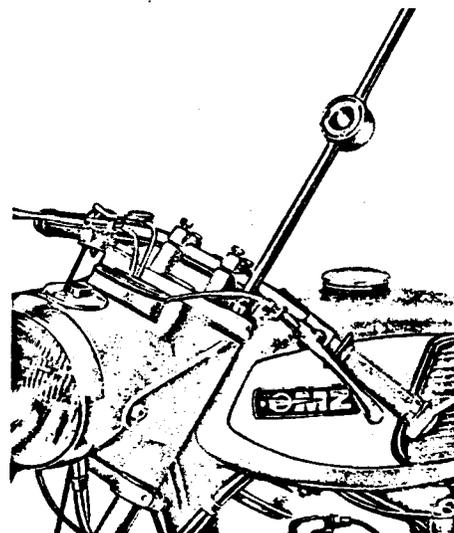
Assembling and removing the guide tubes with the help of the combined assembling spanner
